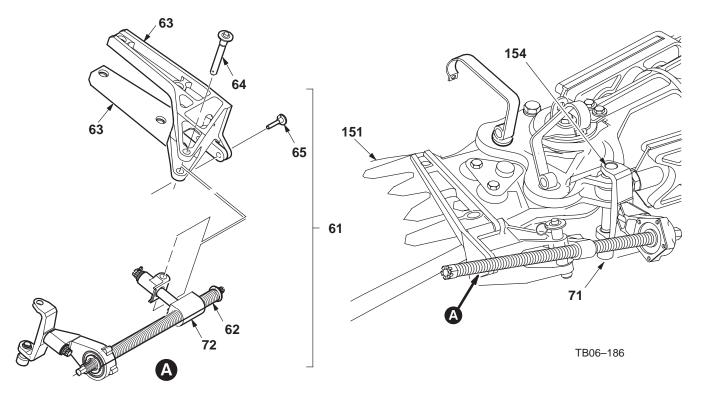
Blade Positioning Assembly on L/H FWD Main Rotor Blade
